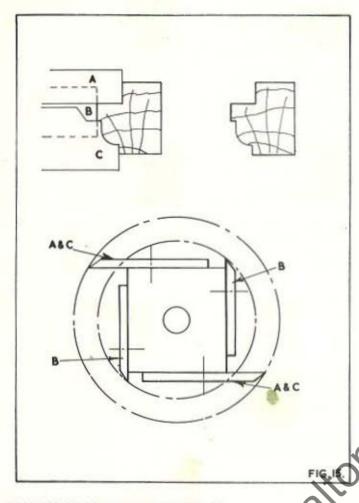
(a) SIMPLE REBATE. By using two pair of cutters there is very little grinding to be done, only side relief on the cutters "B" to give a good clean cut and prevent burning. Cutters are mounted on all sides of the block. This also spreads the cut over the four sides of the block and gives a smoother action.
